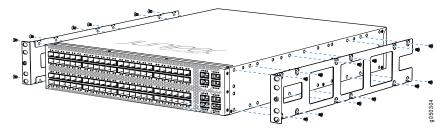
Attaching Mounting Rails to the QFX5100-24Q
